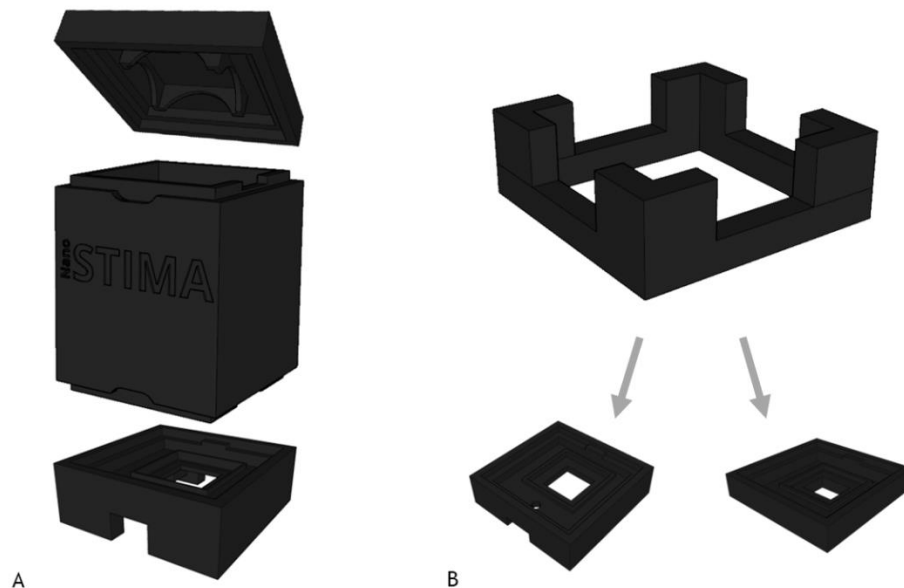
Supporting sensor structure: A - Exploded view of the whole structure; B - Universal socket and example of matching bases
